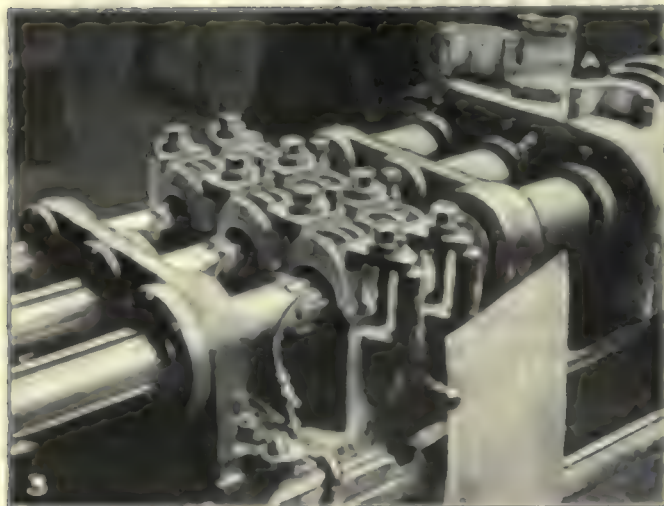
BORING THE BEARING CAPS IN GROUPS.
